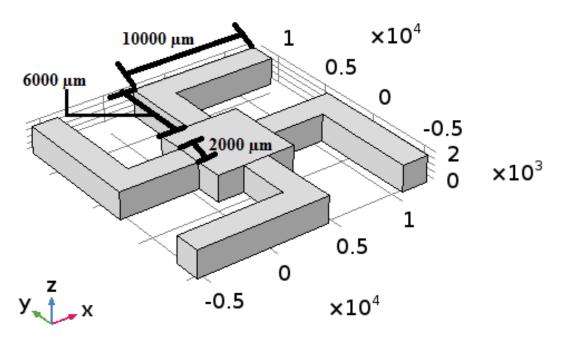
Geometrical view of Swastik-shaped flexible L-beam PBEH
